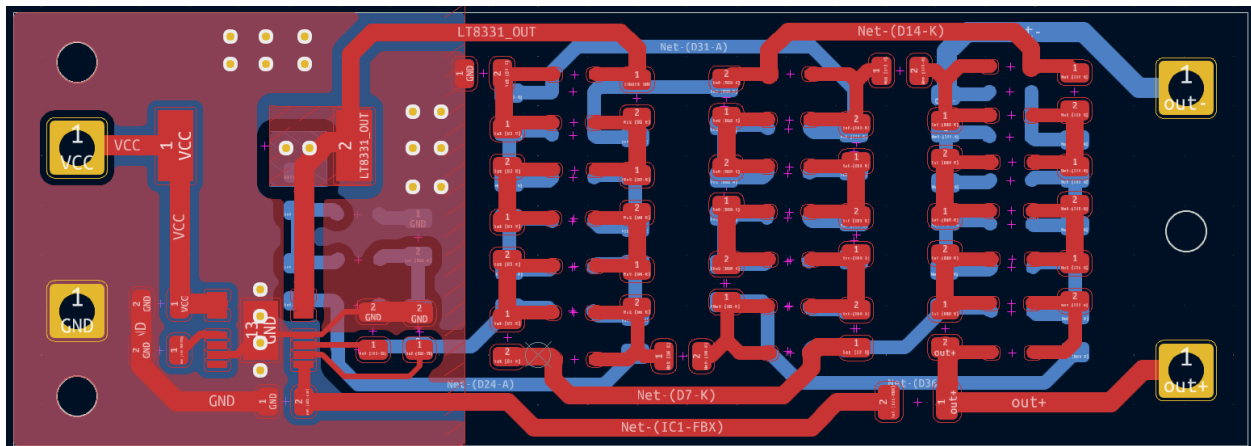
PCB layout of the transformerless DC-DC converter.
